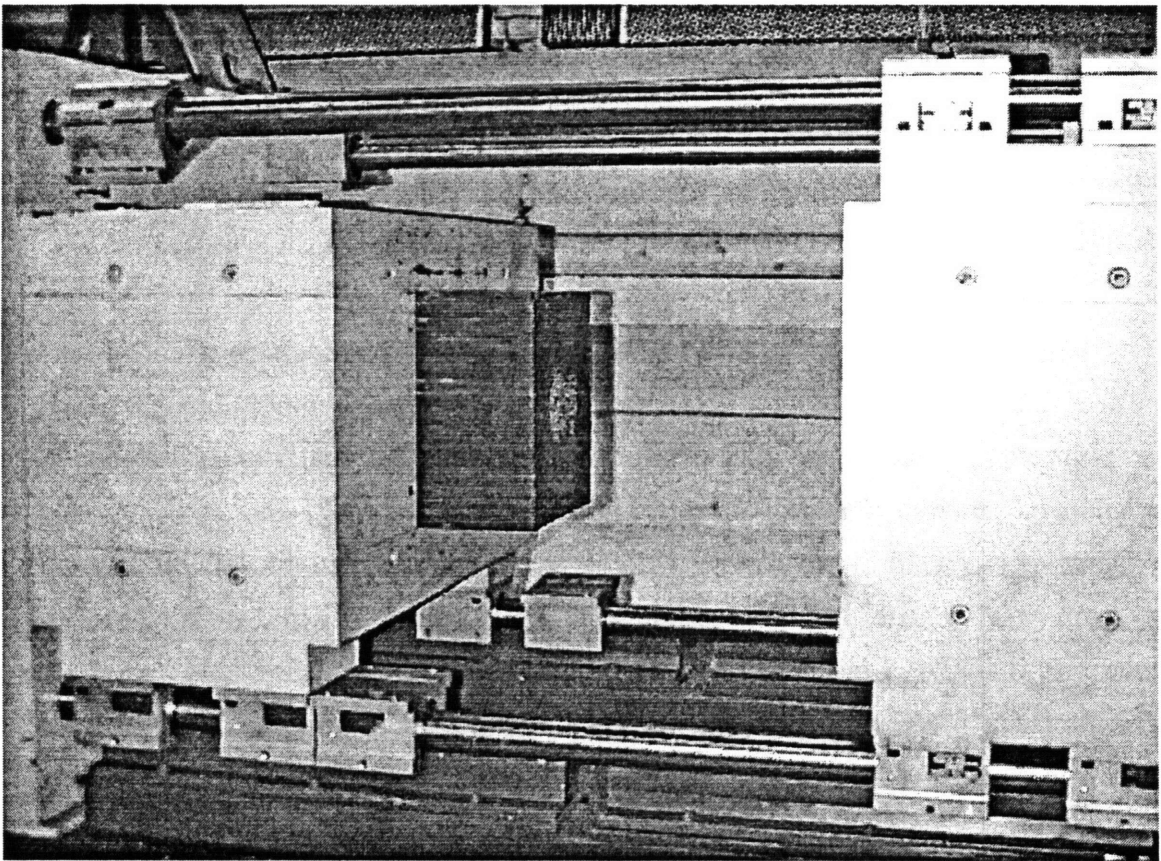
Flexible Sheet Metal Forming Press at MIT
